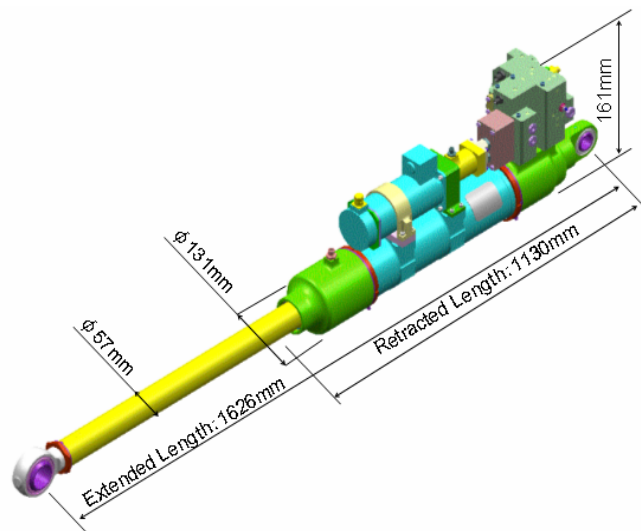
Three-dimensional View of prototype Landing Gear EHA
